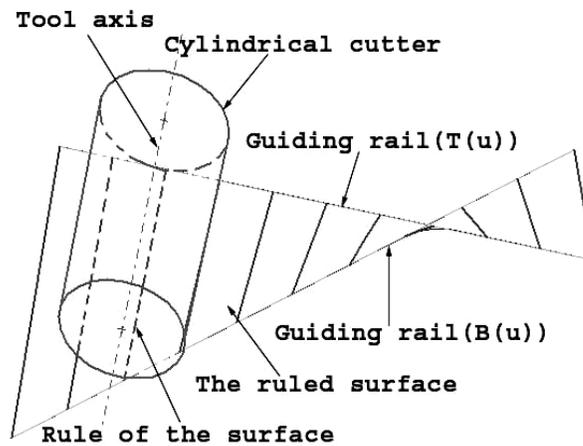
Position of the cylindrical tool and the ruled surface.
